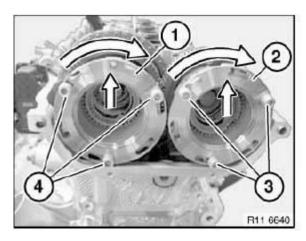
Pulling VANOS Gear With Outer Sleeve Forwards Courtesy of BMW OF NORTH AMERICA, INC.
